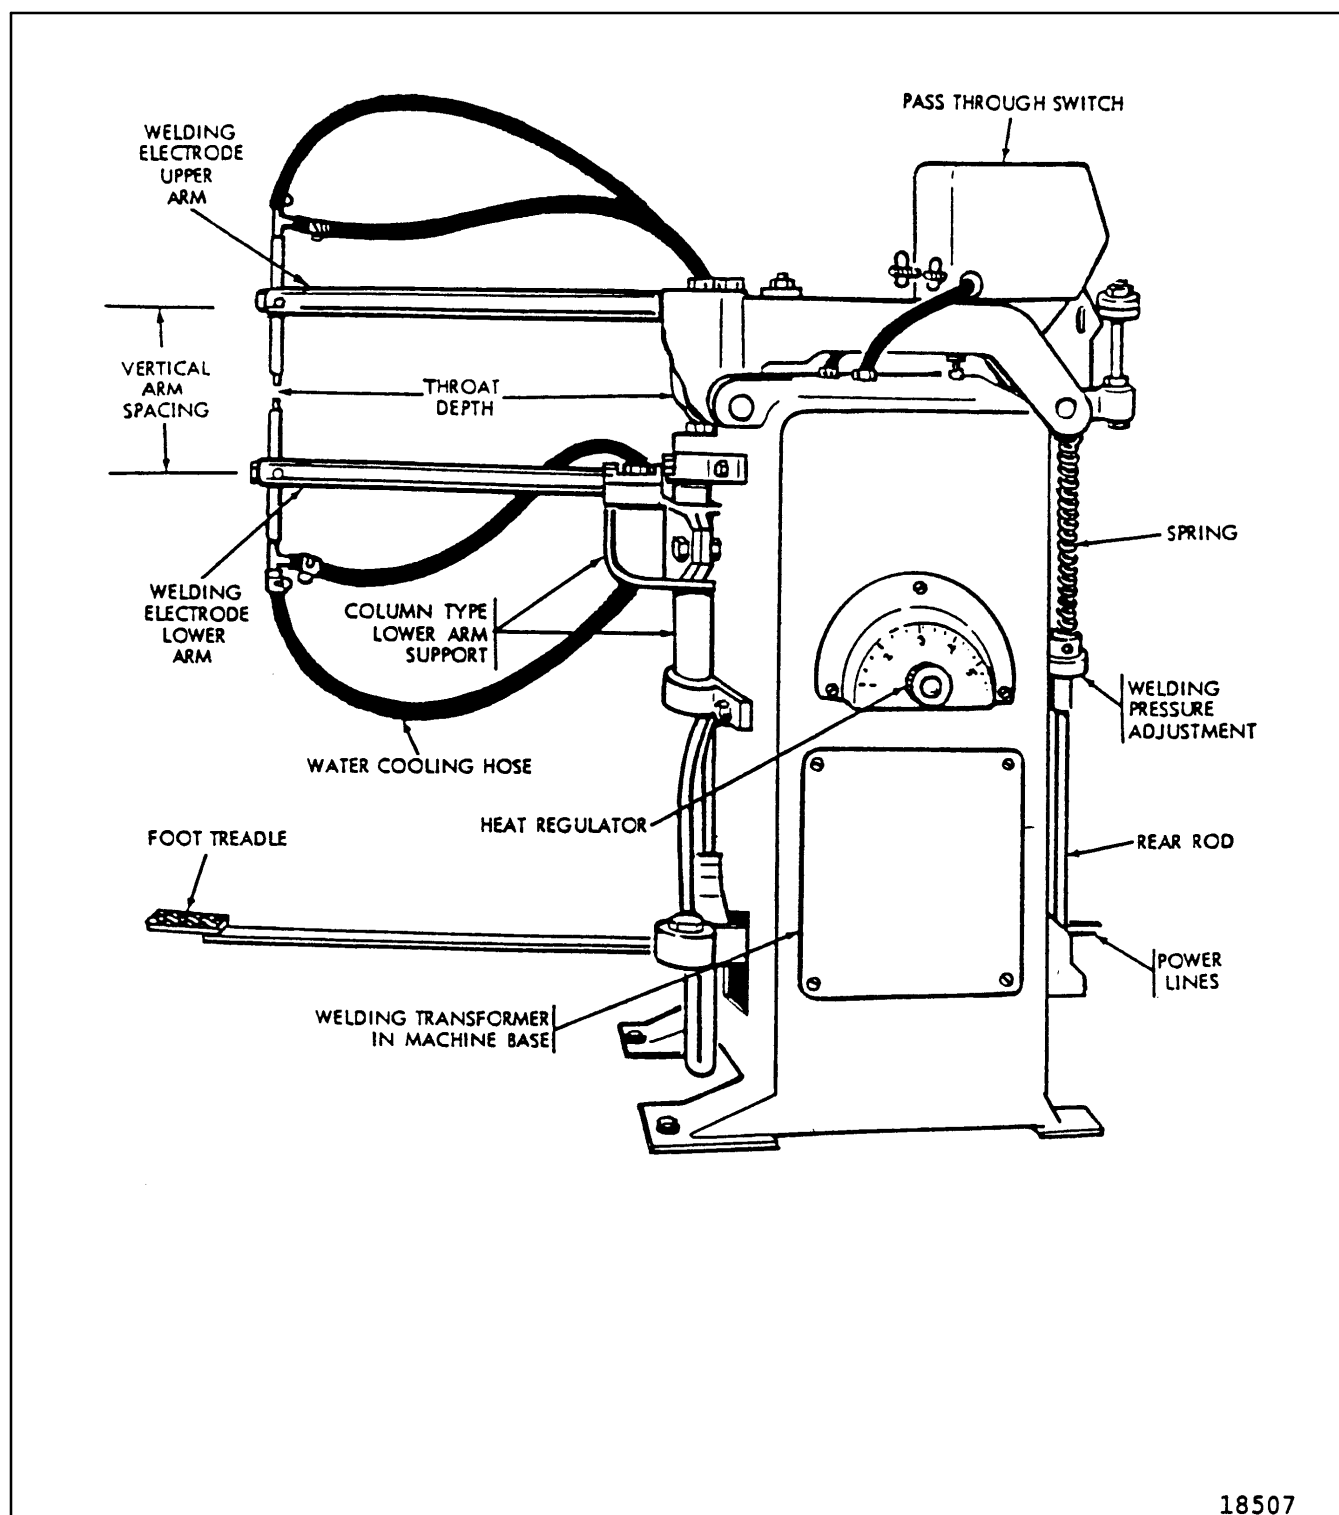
Resistance Spot Welding Machine and Accessories
